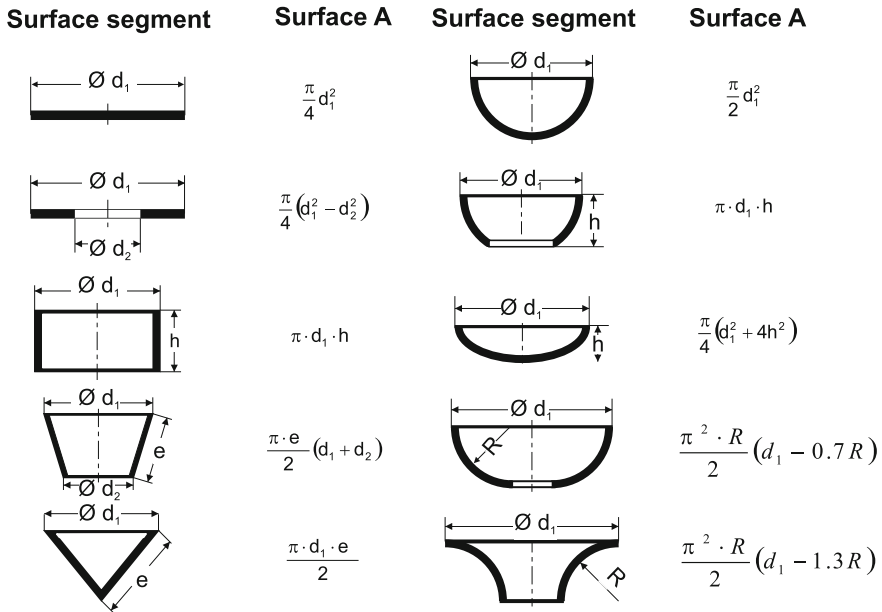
Selected surface elements for calculating the blank dimensions (acc. to Oehler/Kaiser [OEHL01])
